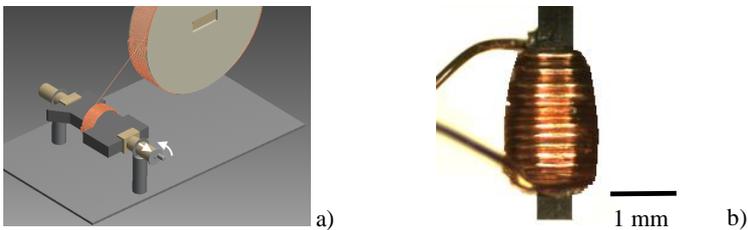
a) Winding tool (schematic), b) Cu-coil on the head core After the winding process, the two parts of the C-core were assembled keeping both parts of the C-core in parallel. The parallelism during the mounting process was achieved by two glass plates (Fig. 4).
